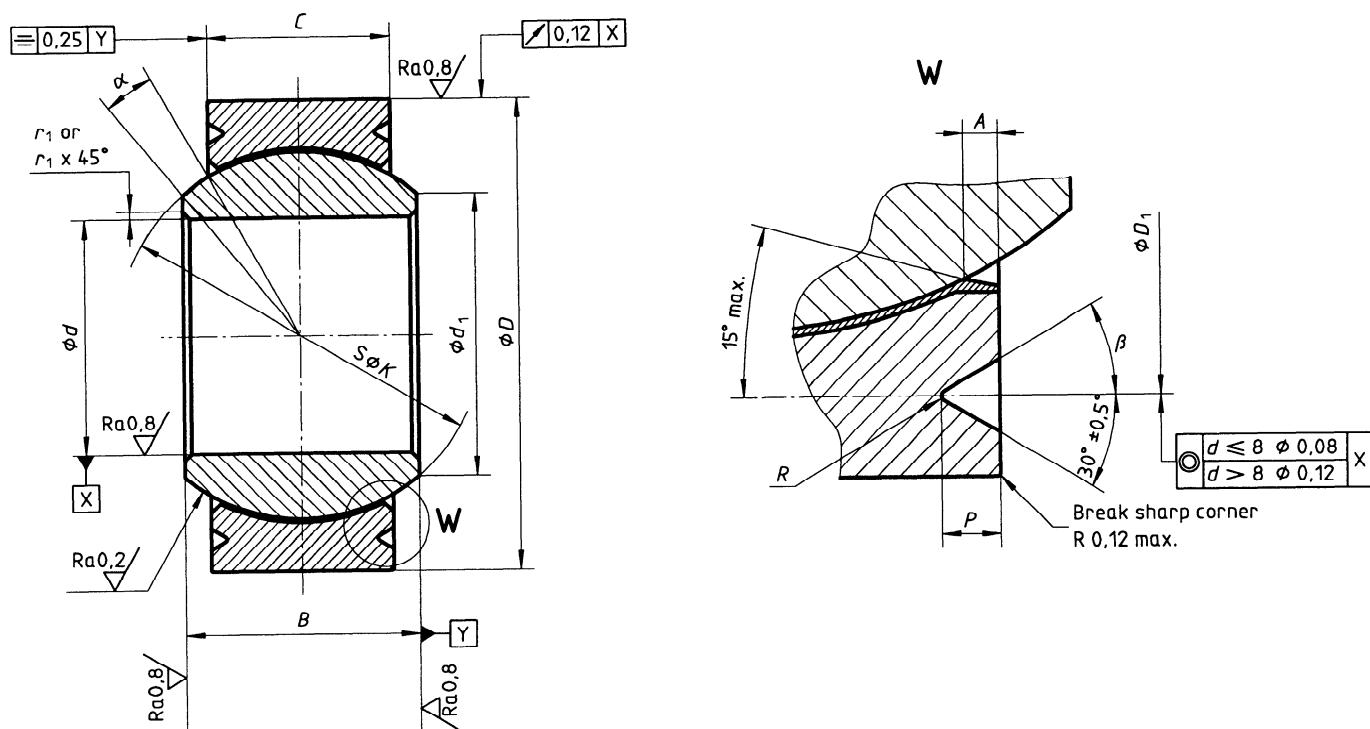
Spherical plain bearing with self-lubricating liner with face groove
